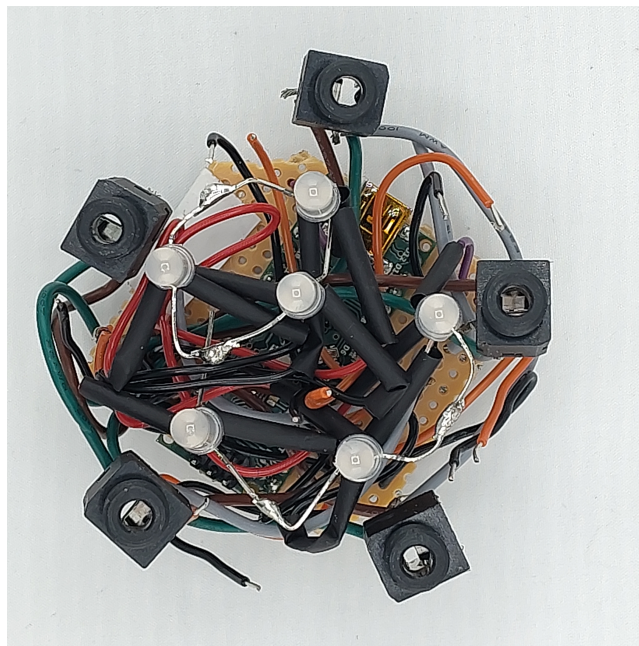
The soldered internals of a node. Buttons are not shown because these have to be soldered through the holes in the casing, which would obstruct the image.
